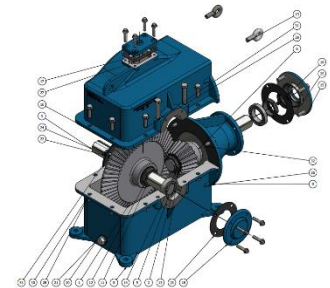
bevel gear exploded view (15kW-GR1/3-1.5krpm), 2015
